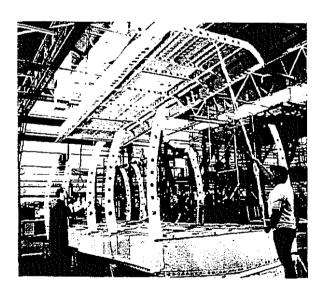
Assembly of EH101 main cabin showing frames machined from AA8090 cold compressed die forgings.
